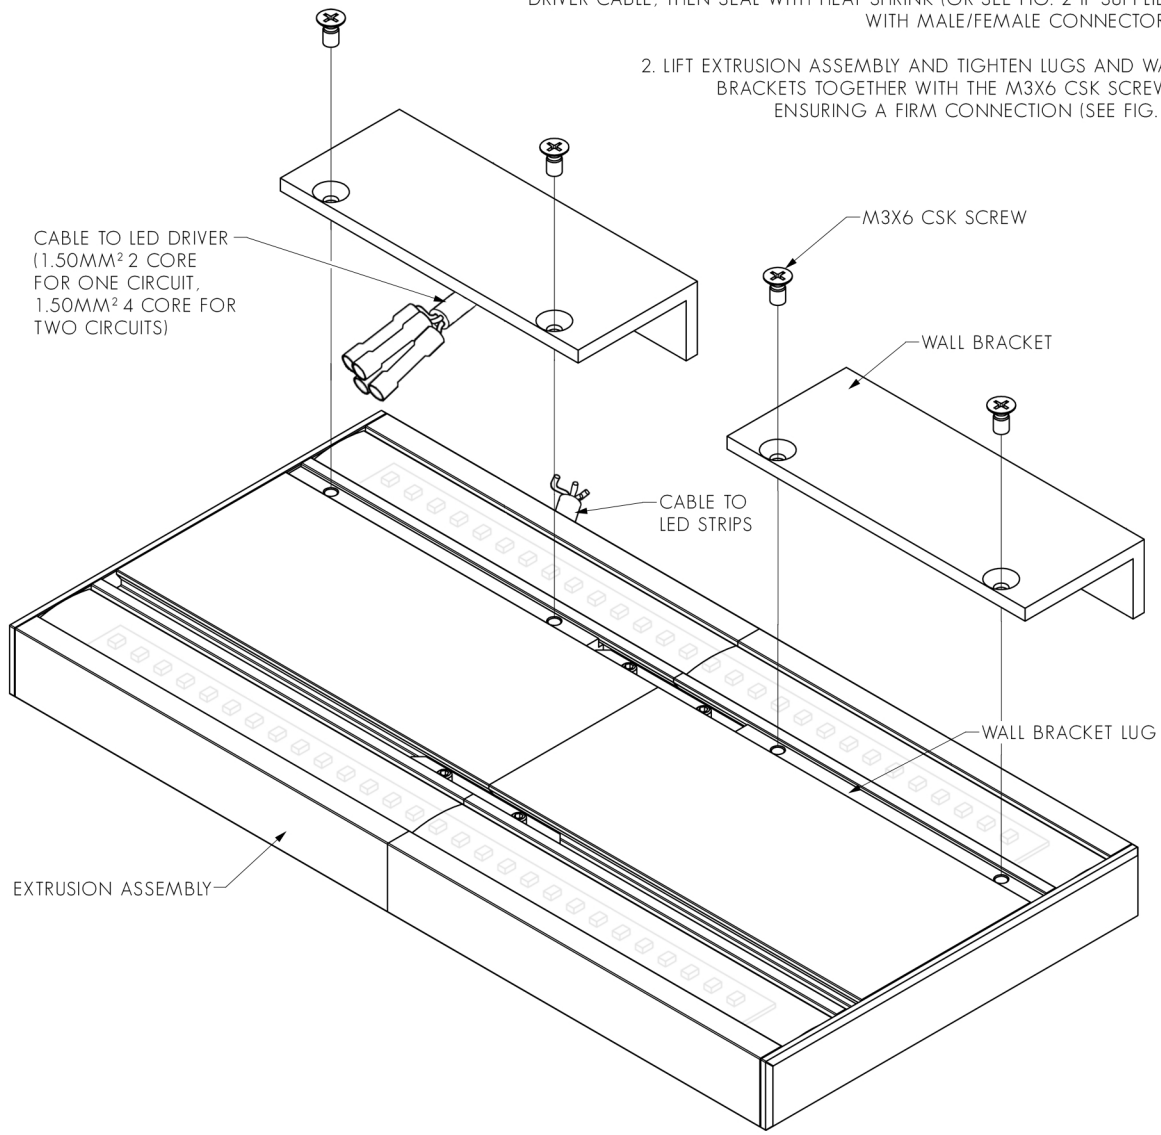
ENSURE EXTRUSION IS MOUNTED SECURELY
